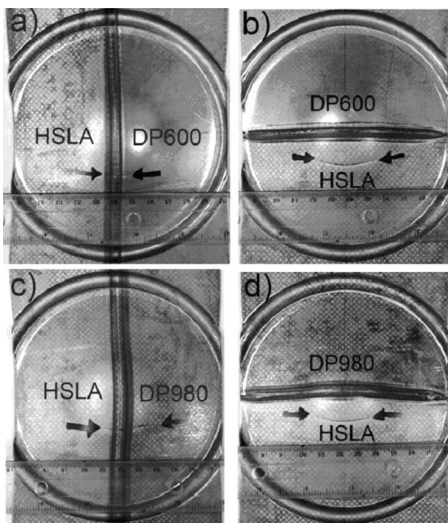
Plane strain stretch formed laser welded coupons with different weld orientations: (a) longitudinal DP600-HSLA, (b) transverse DP600-HSLA, (c) longitudinal DP980-HSLA, and (d) transverse DP980-HSLA
